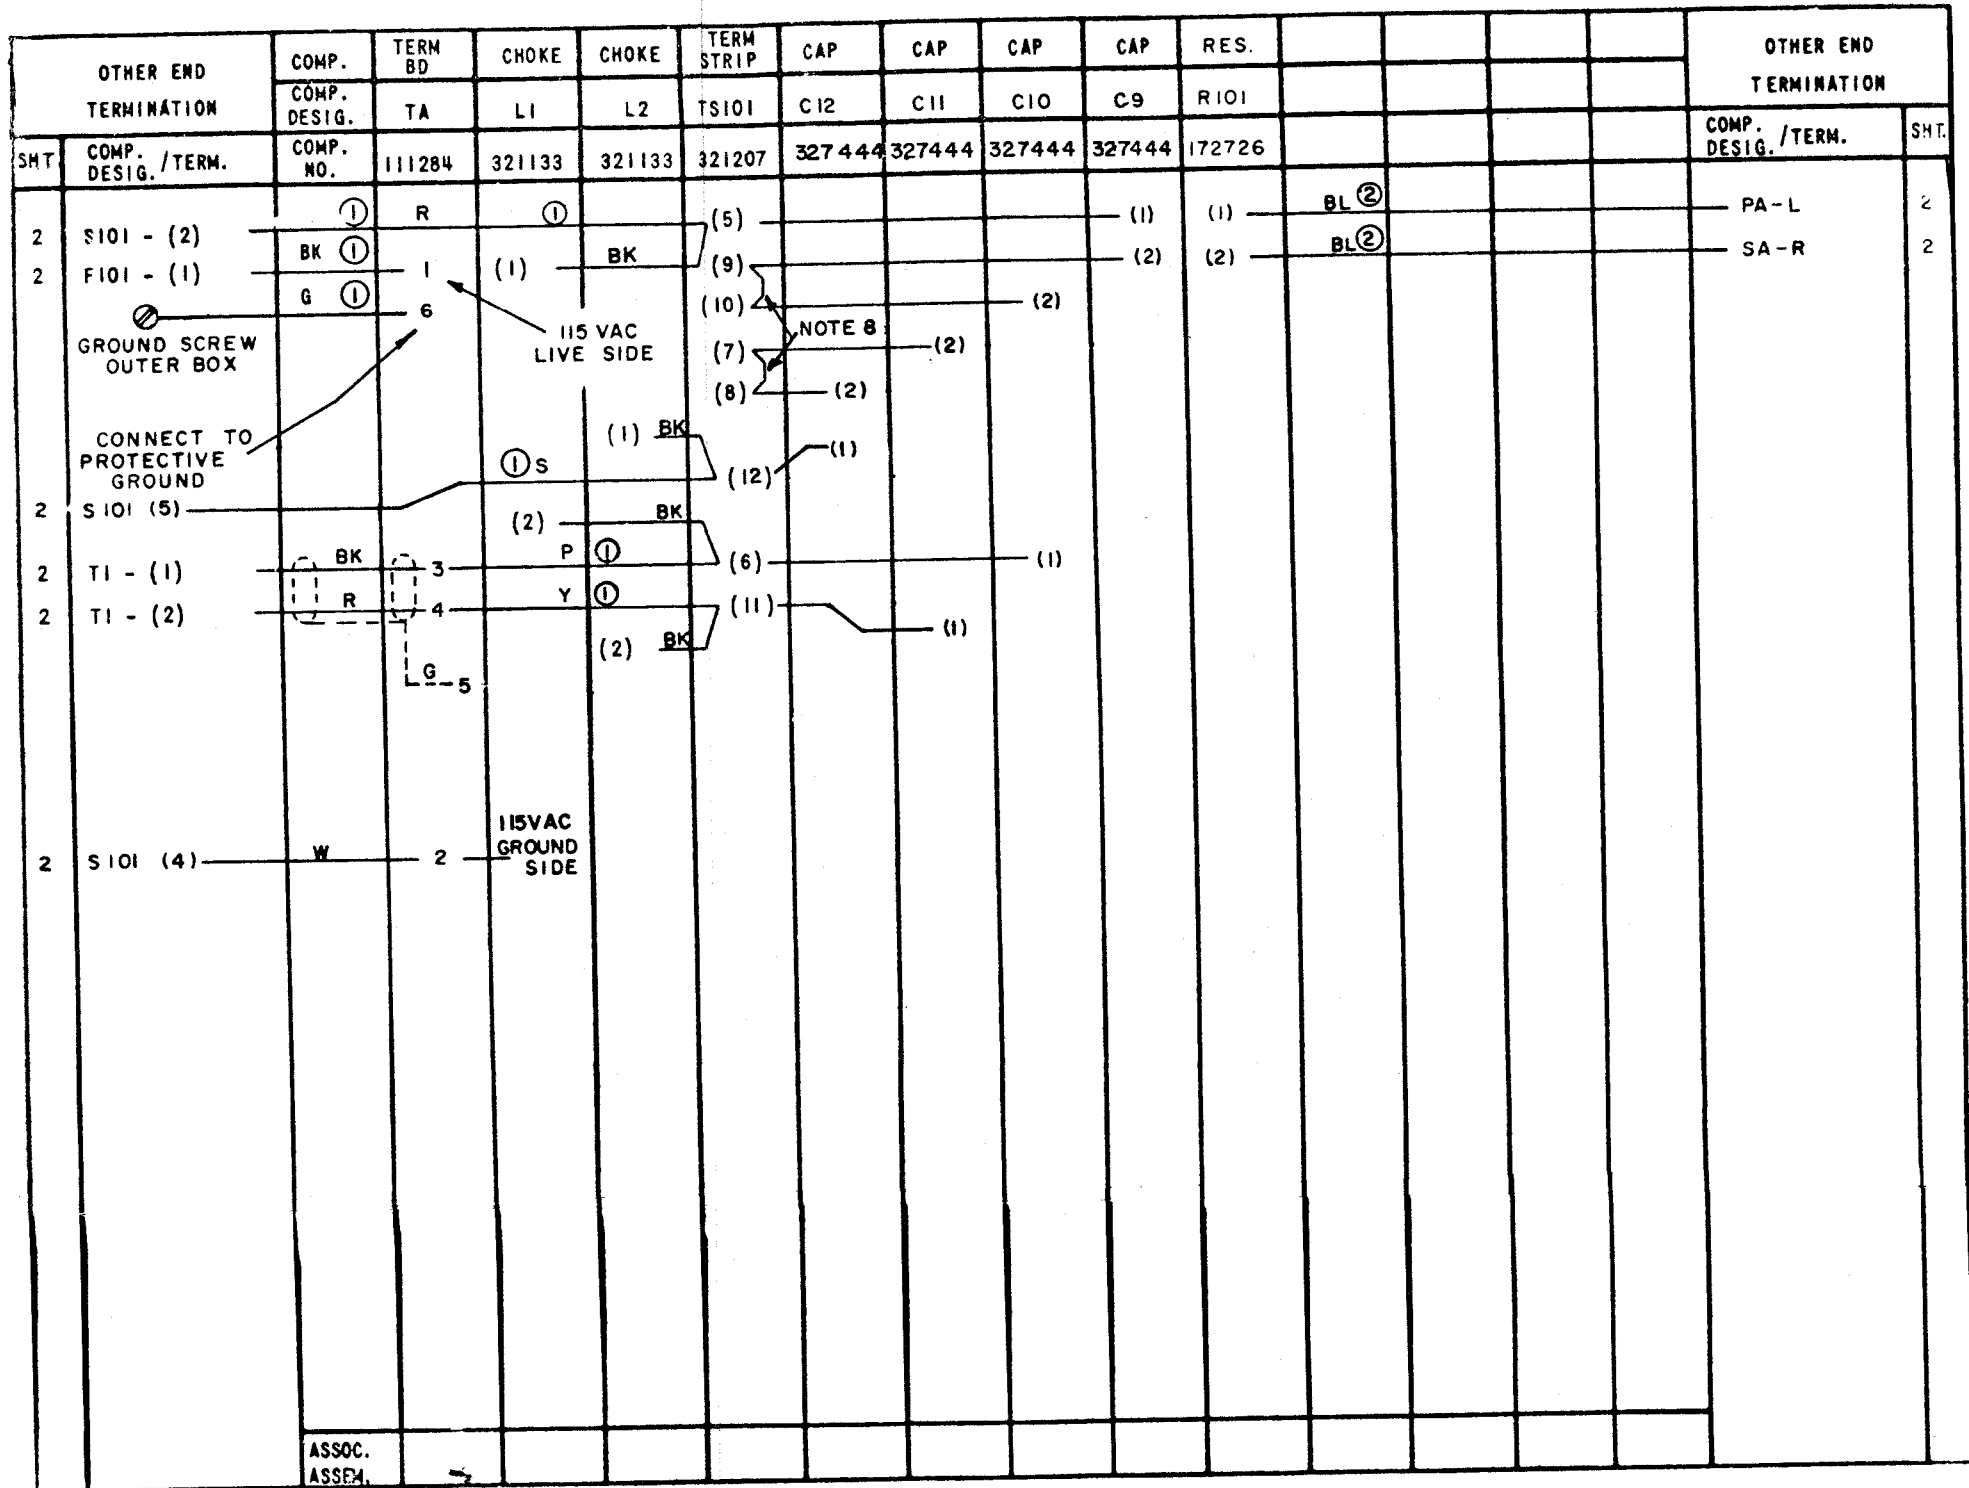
323813 Electrical Service Assembly Wiring Diagram (Sheet 3 of 3)
